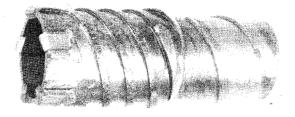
Drill bit with 5 tungsten carbide cutting tips. The bit is 6.0 cm long, and the narrow end is typical of threaded joints between the stem tubes.
